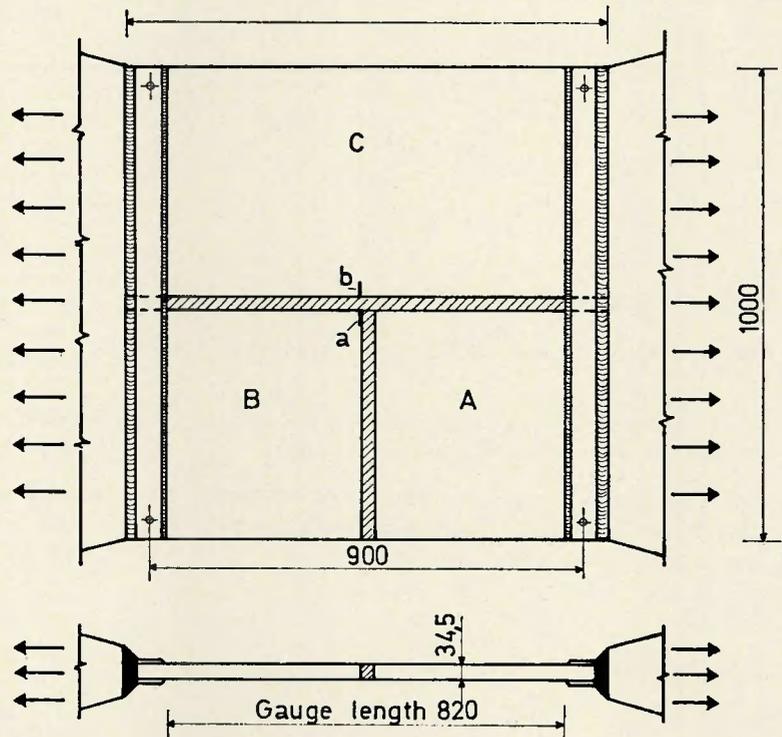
Special wide plate specimen, which reveals area with lowest ductility. Dimensions in mm. Saw cut "a" is made in HAZ of plate B after welding to A; saw cut "b" is made in plate C before welding to AB
